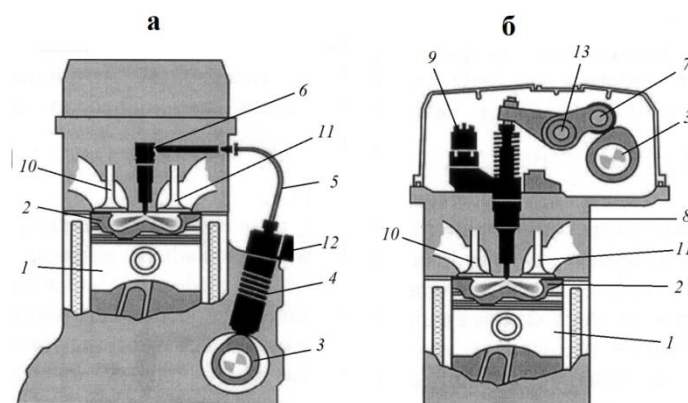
Fuel supply systems of a four-stroke diesel: a - traditional with separately executed mechanical nozzle, injection pump and their common fuel rail; b - electronic combined electromechanical pump-injector 1 - piston; 2 - combustion chamber; 3 - cam camshaft; 4 - injection pump; 5 - high pressure pipeline; 6 - nozzle (injector); 7 - rocker; 8 - pump-injector; 9 - solenoid valve; 10 - inlet valve; 11 - exhaust valve; 12 - fuel rail; 13 - axis of the rocker
